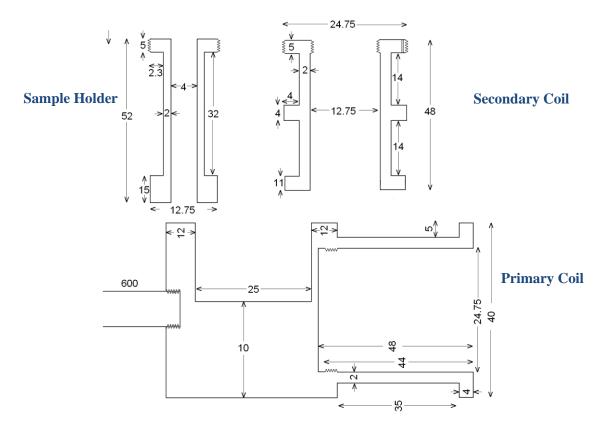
shows the dimension (in mm) of the primary ,secondary coil and the sample holder.
